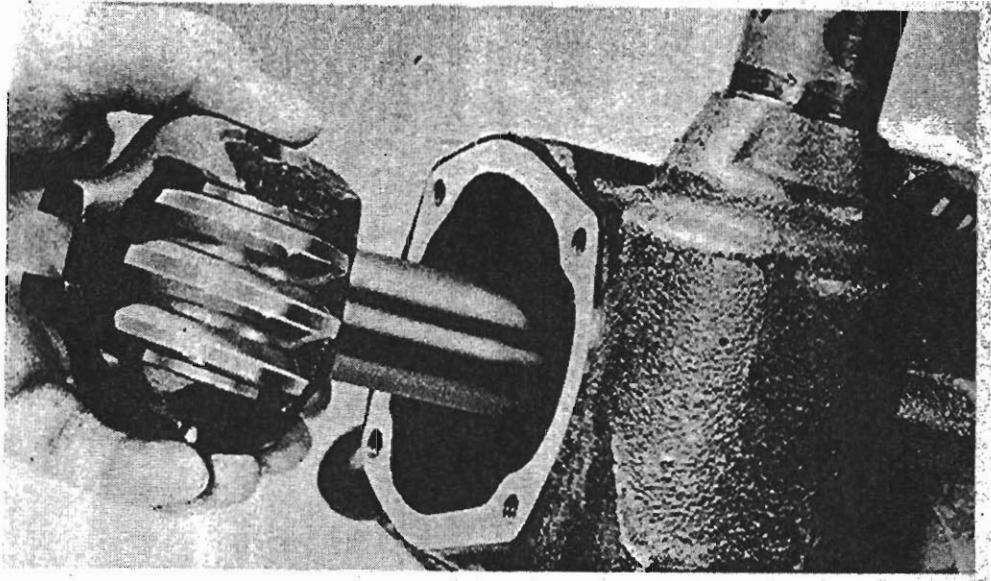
Remove the Cross Shaft Cover Assembly and Then Lift Out the Cross Shaft.
